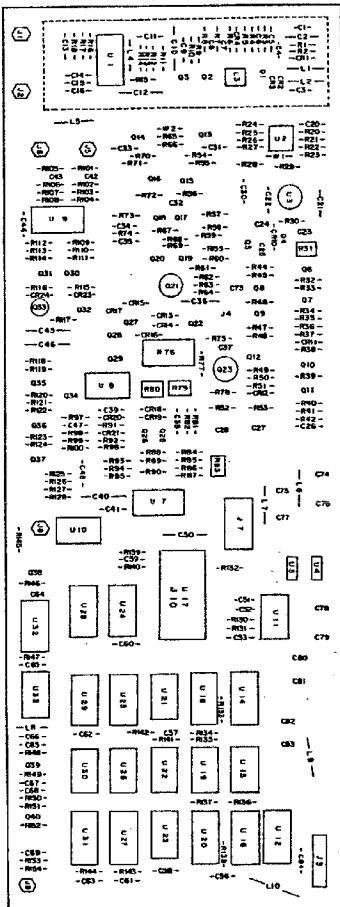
A4 Fractional N Loop Board Assembly Component Locations.
